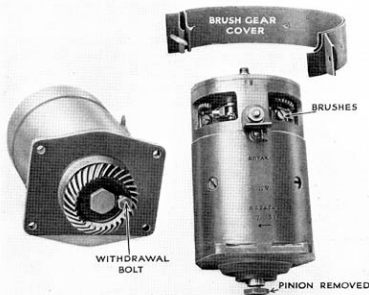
Two views of the dynamo showing the Brush cover removed, and the method of withdrawing the gear from the shaft by two  $\frac{1}{4}$ " B.S.F. bolts.
